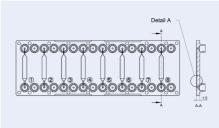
Detail of the barrier chamber chip Fluidic 1329
